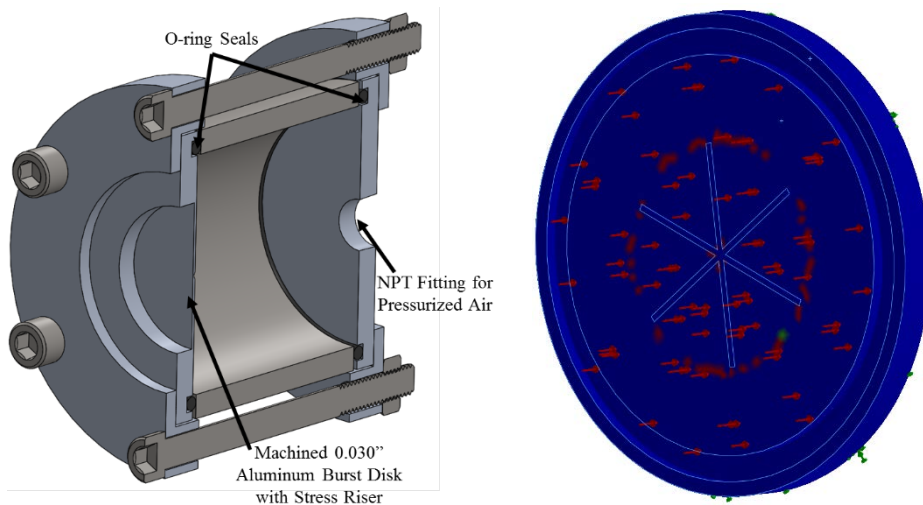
Pressure release burst disk assembly integrated directly to aluminum plate: (a) sectioned view of the design, (b) FEA results for 30 psi on the aluminum burst disk plate with engraved stress riser shown; all areas shown in red signify zones where the FoS is less than 1 (minimum FoS is 0.955)
